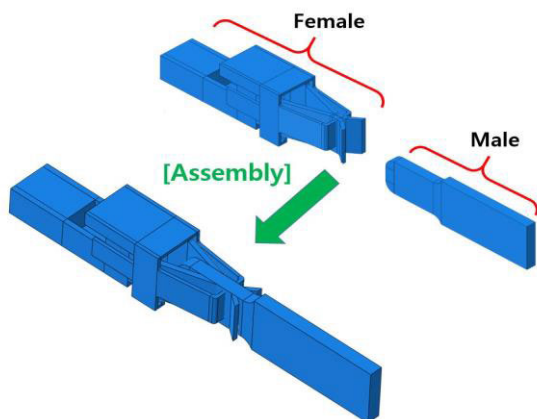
Modeled vehicle sensor connector before and after assembly.
